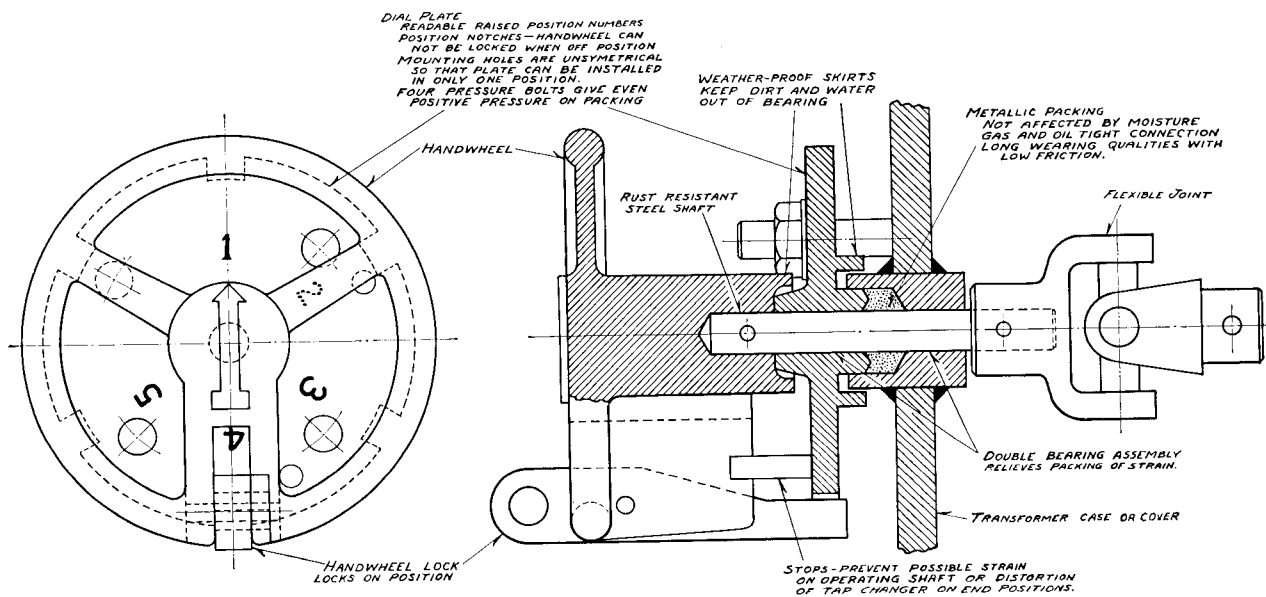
TYPICAL OPERATING MECHANISM FOR COVER MOUNTING
